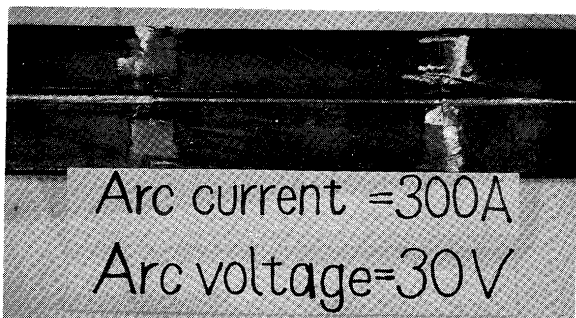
Appearance of the automatic control welded work piece.
